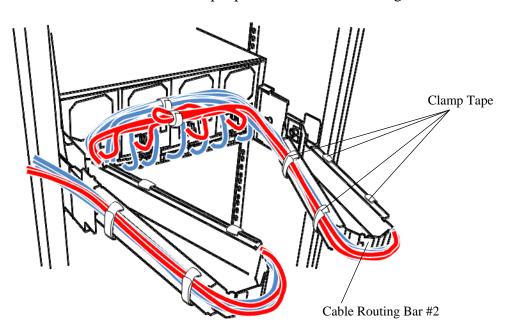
Removal of Clamp Tapes
